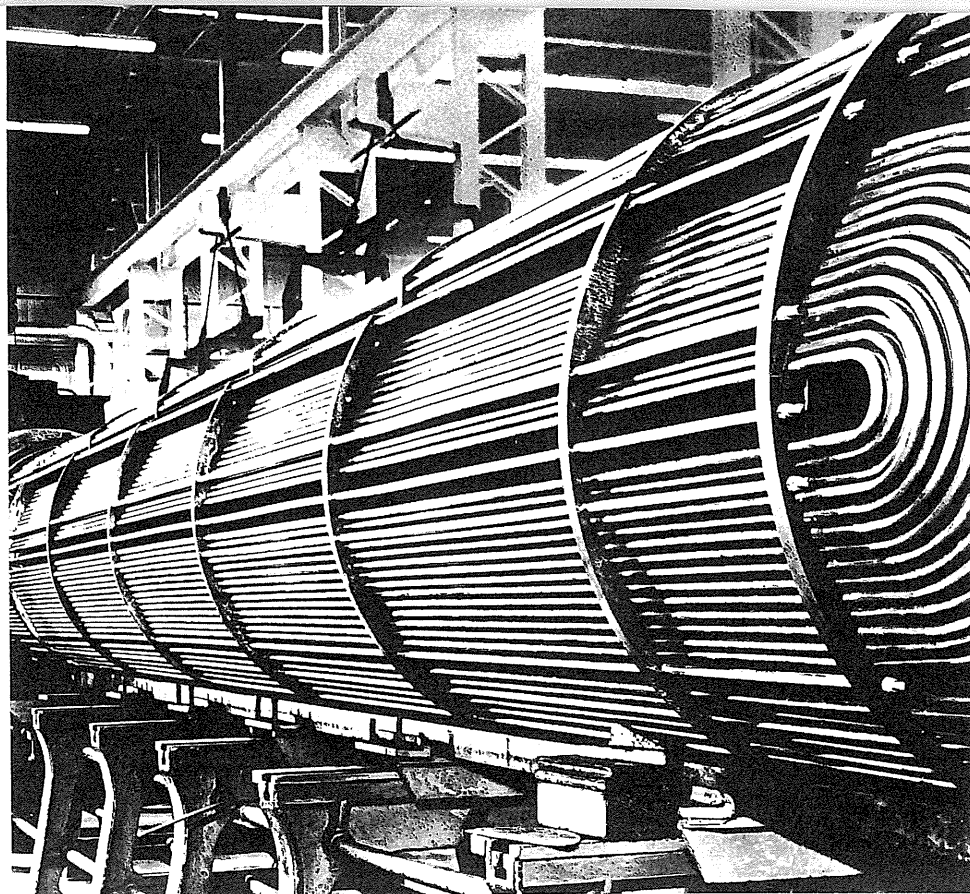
Copper-nickel alloy tubing for sea water desalination plant.
